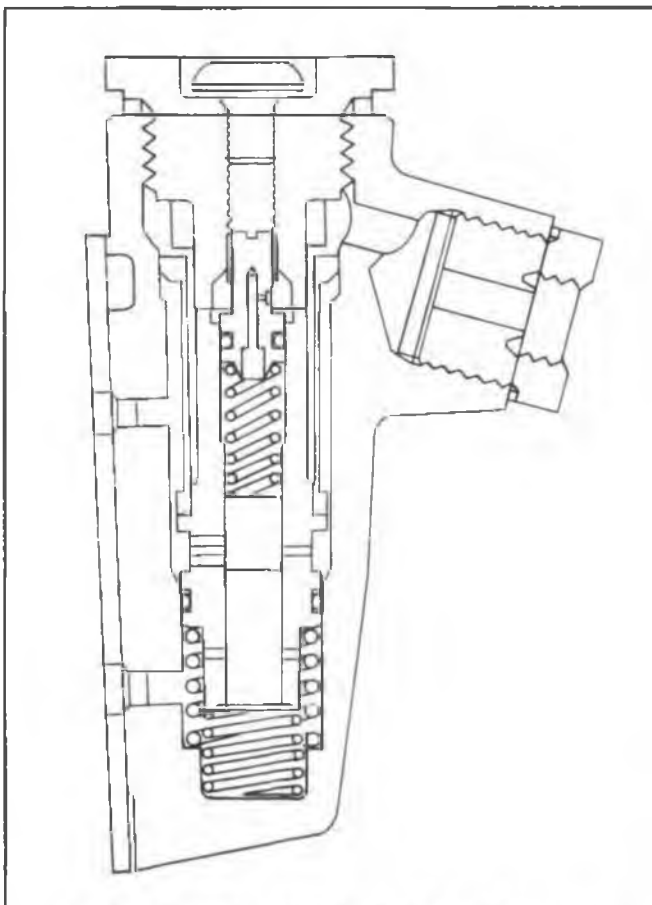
A Regulating Valve Closed (Engine Cranking)
